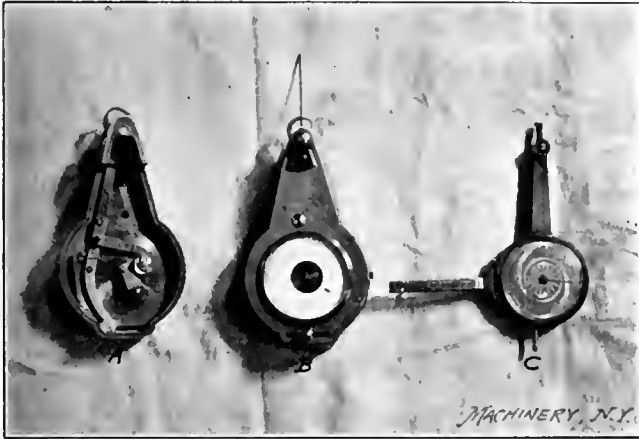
Caliper Gage and Test Indicator used in Watchmaking, Illinois Watch Company
